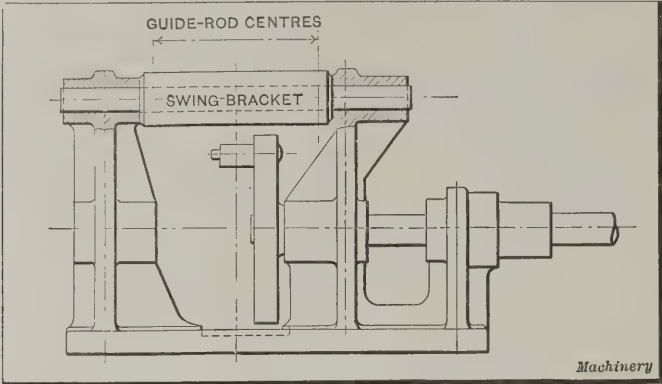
Arrangement of Bearings for Guide Frame, viewed from the Back
